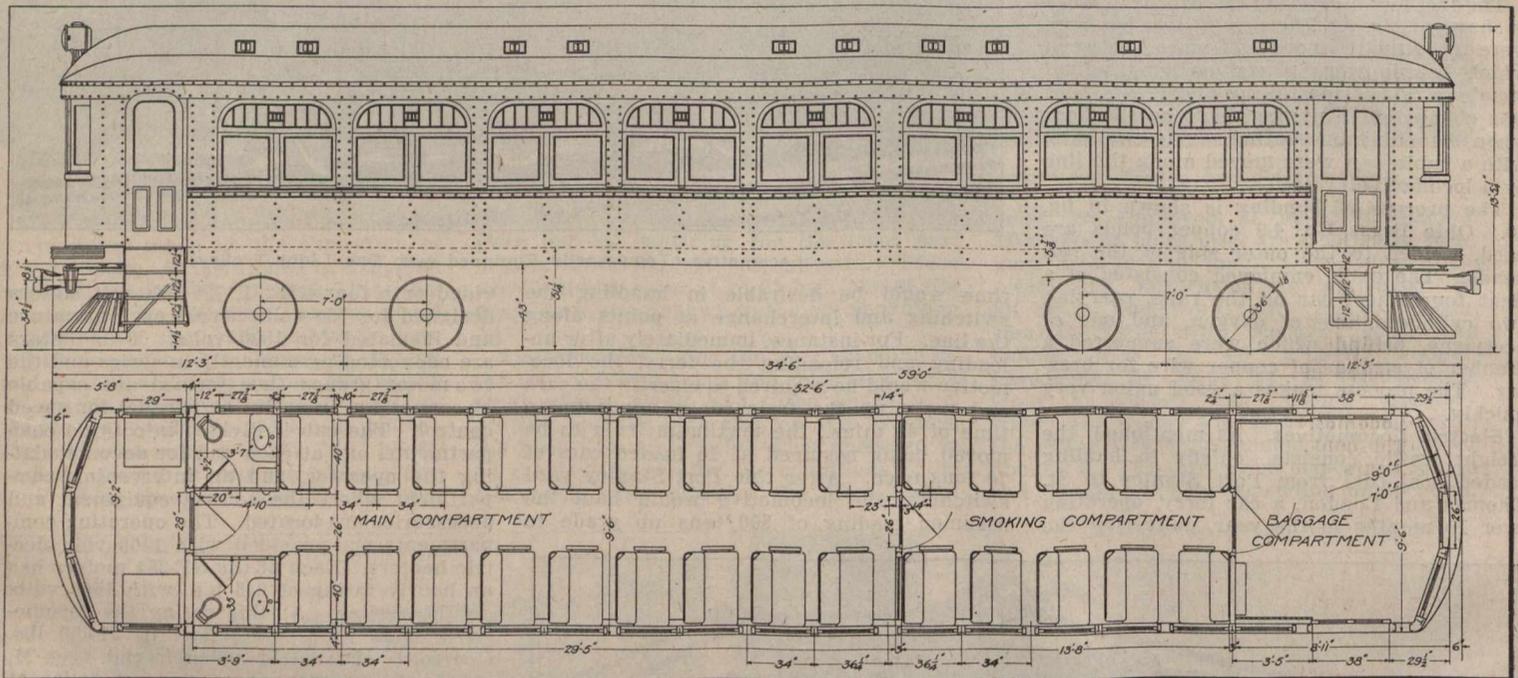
Plan and Elevation of All Steel Motor Cars for London & Port Stanley Railway.
